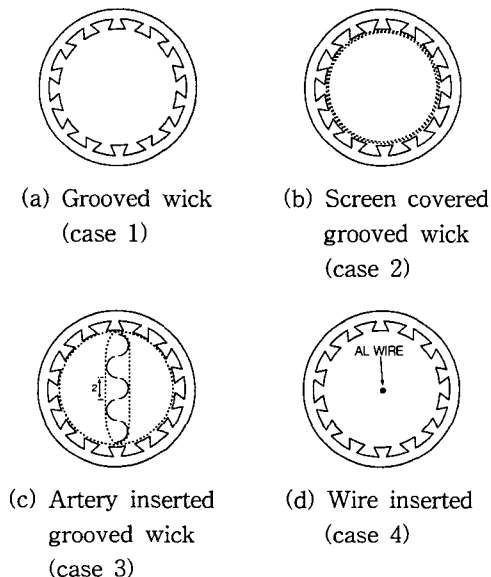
Cross sections of the heat pipes fabricated by drawing (unit: mm).
